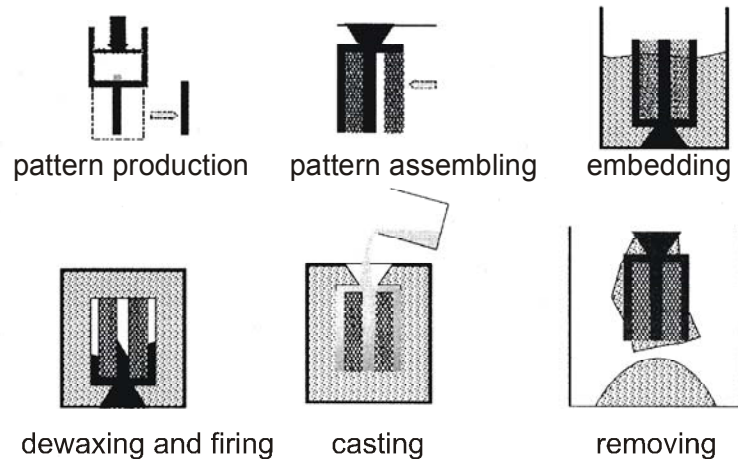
A schematic drawing of the investment casting process for the production of porous materials [HIN99].
